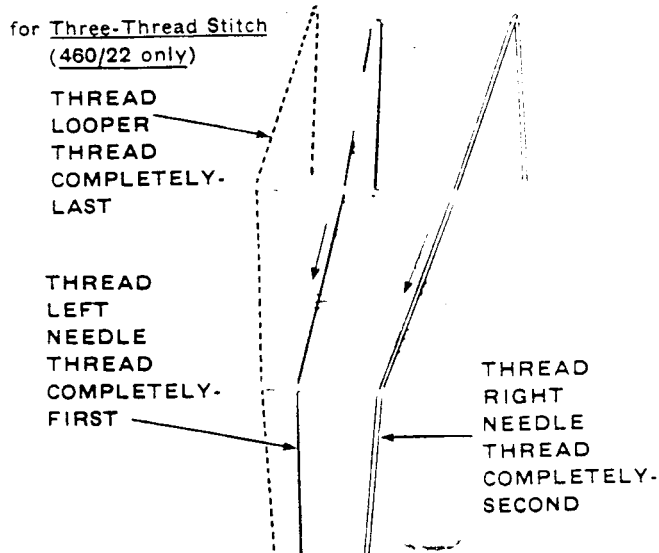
Unwinder 81443 Threaded for Three-Thread Stitch (460 22 Machine only)
